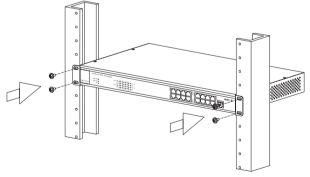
Attaching mounting brackets for a rack mount (4 screws: M5x10)
